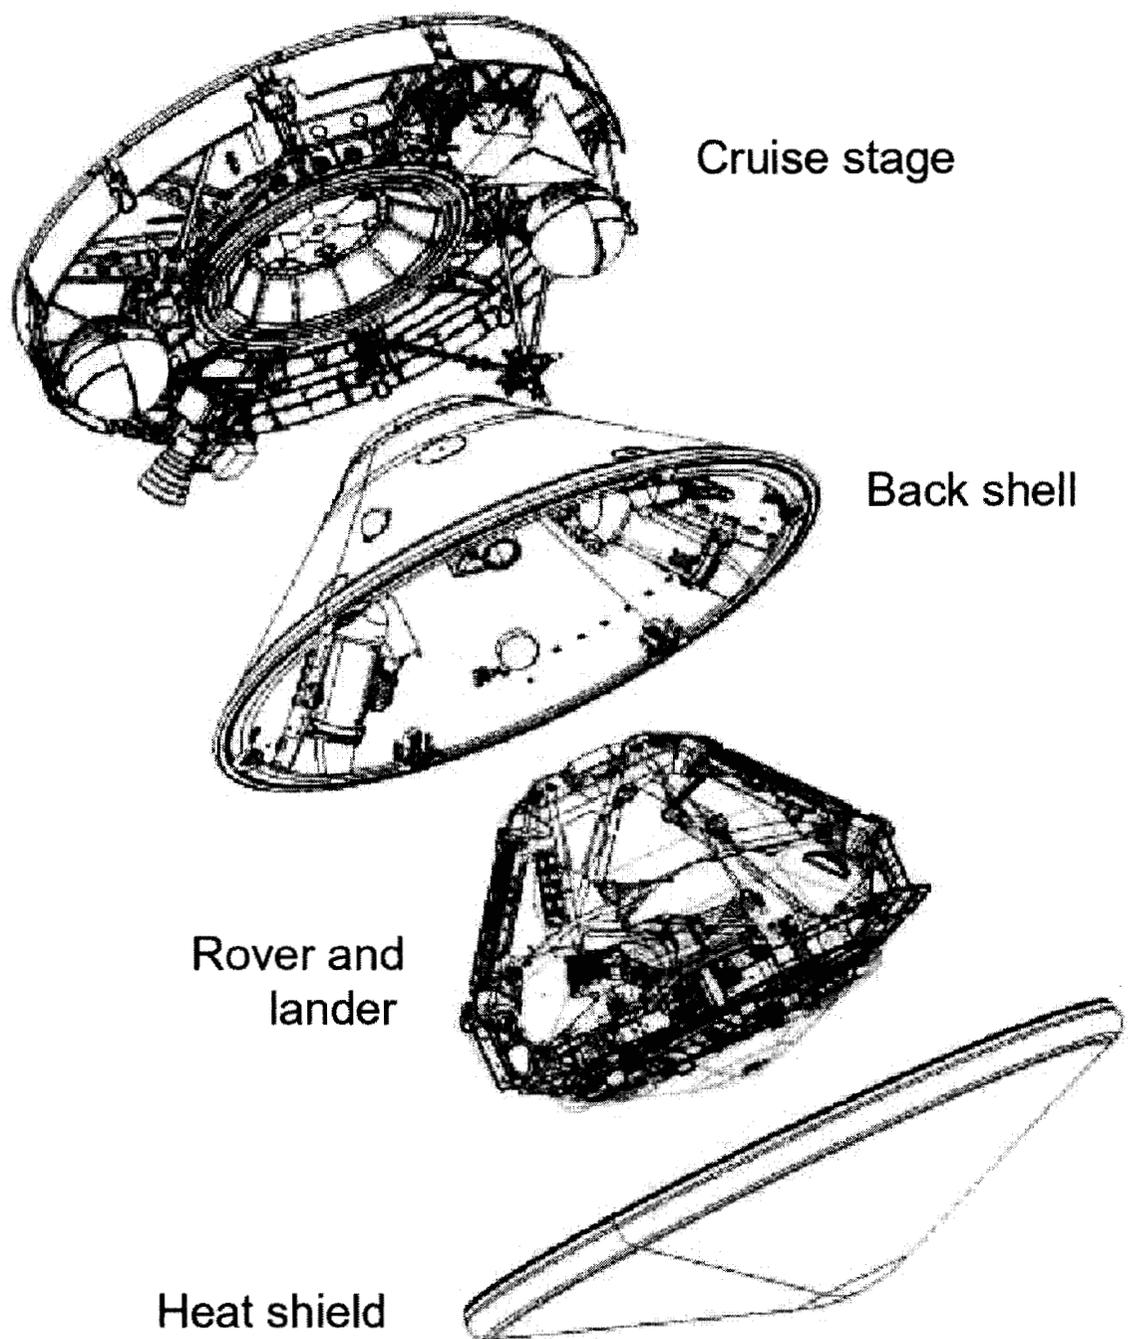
MER Spacecraft Flight Configuration (Exploded View)
